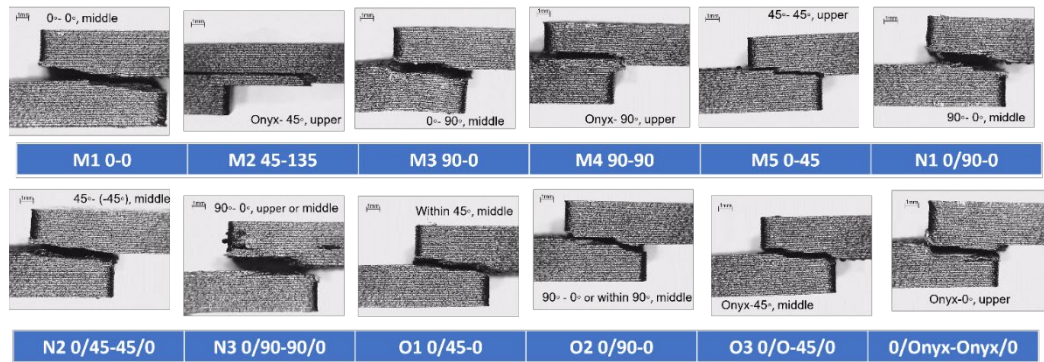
Interlaminar fracture identification for all SLJ specimens.
